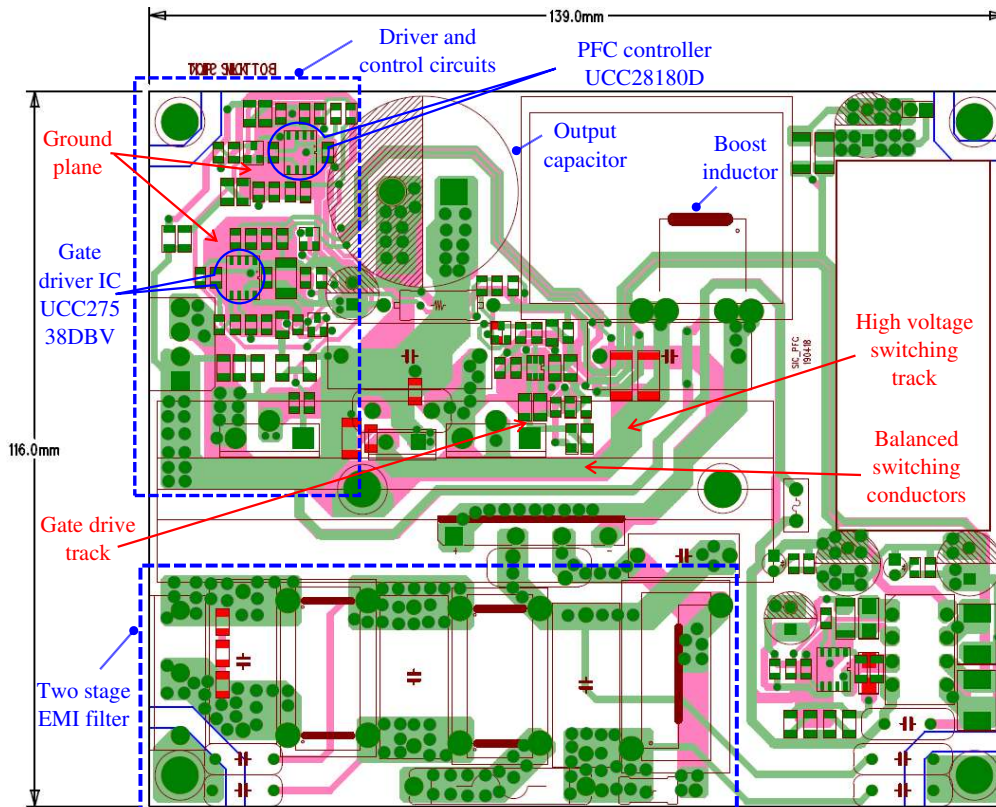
A complete component layout and routing of the PFC rectifier prototype board (two-layer board).
